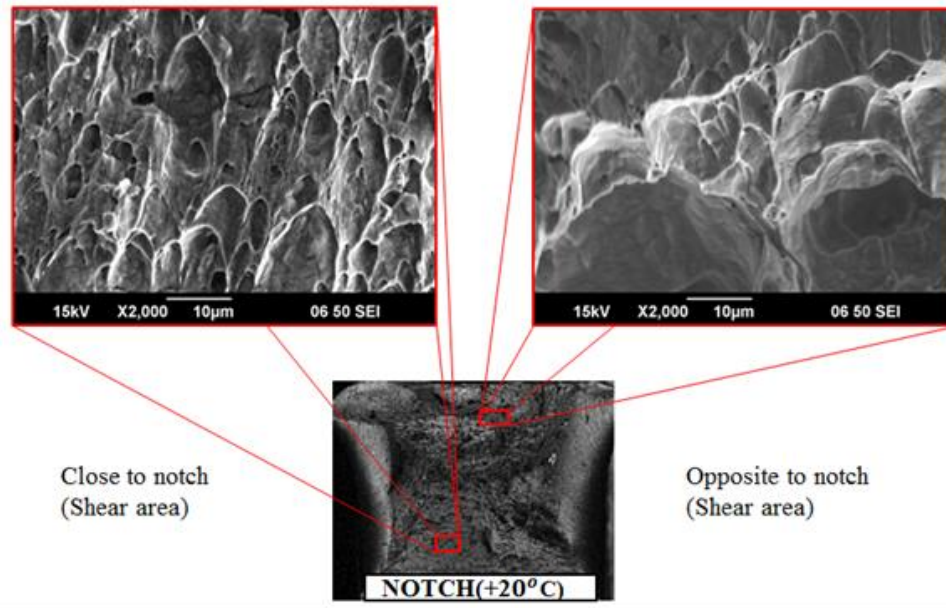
Fracture surface for 10 mm thick CVN specimen at +20°C.
